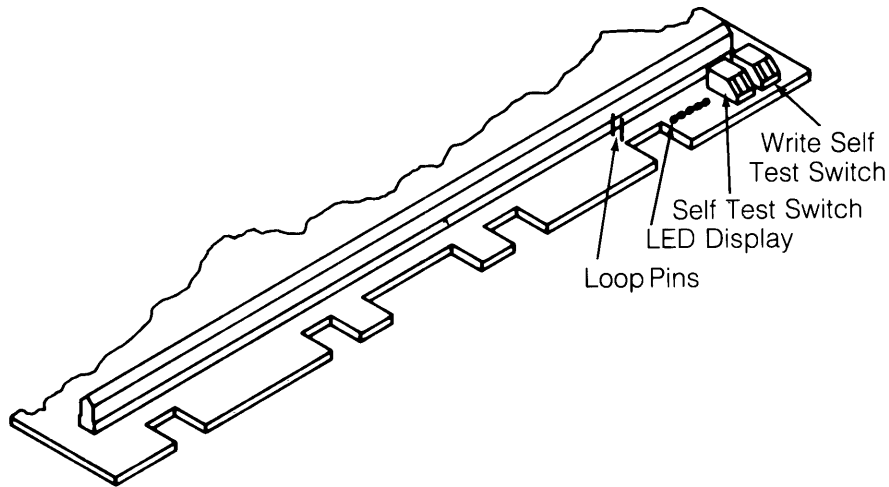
Controller Board A1 (45000-66510) Self-test Controls and Indicators
